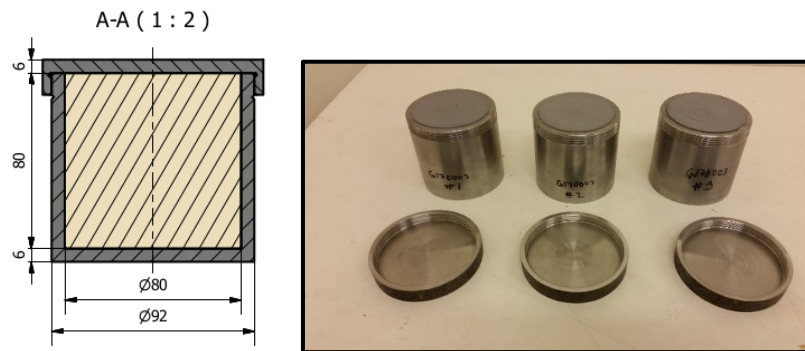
Drawing of the charge (left) and photograph of machined charges with caps off.
